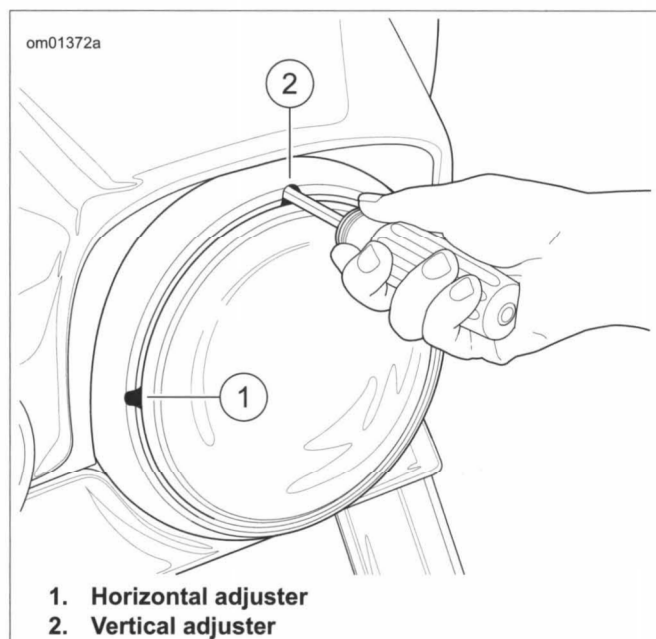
Headlamp Adjusters: All except Frame-Mounted Fairing (typical)
